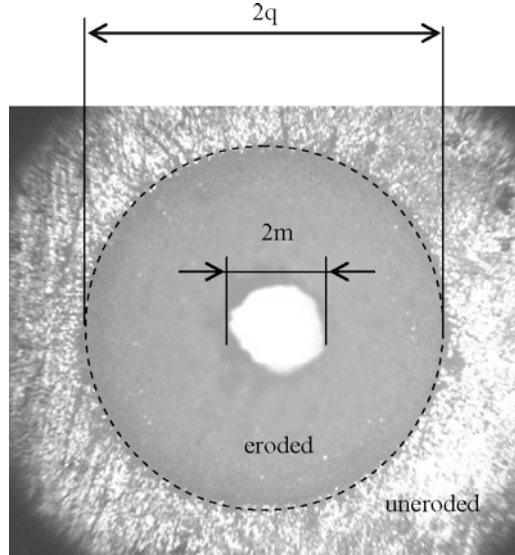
Top view of the eroded hole after boring through [74], reprinted with permission
